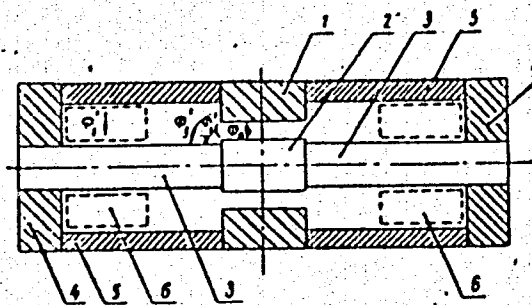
U-shaped cylindrical magnetic system of a low-power DC pump with a helical channel: 1 - external polar terminal; 2 - internal polar terminal; 3 - polar core; 4 - yoke; 5 - external polar core; 6 - driving coil (the axis of the bodies of rotation is horizontal).
